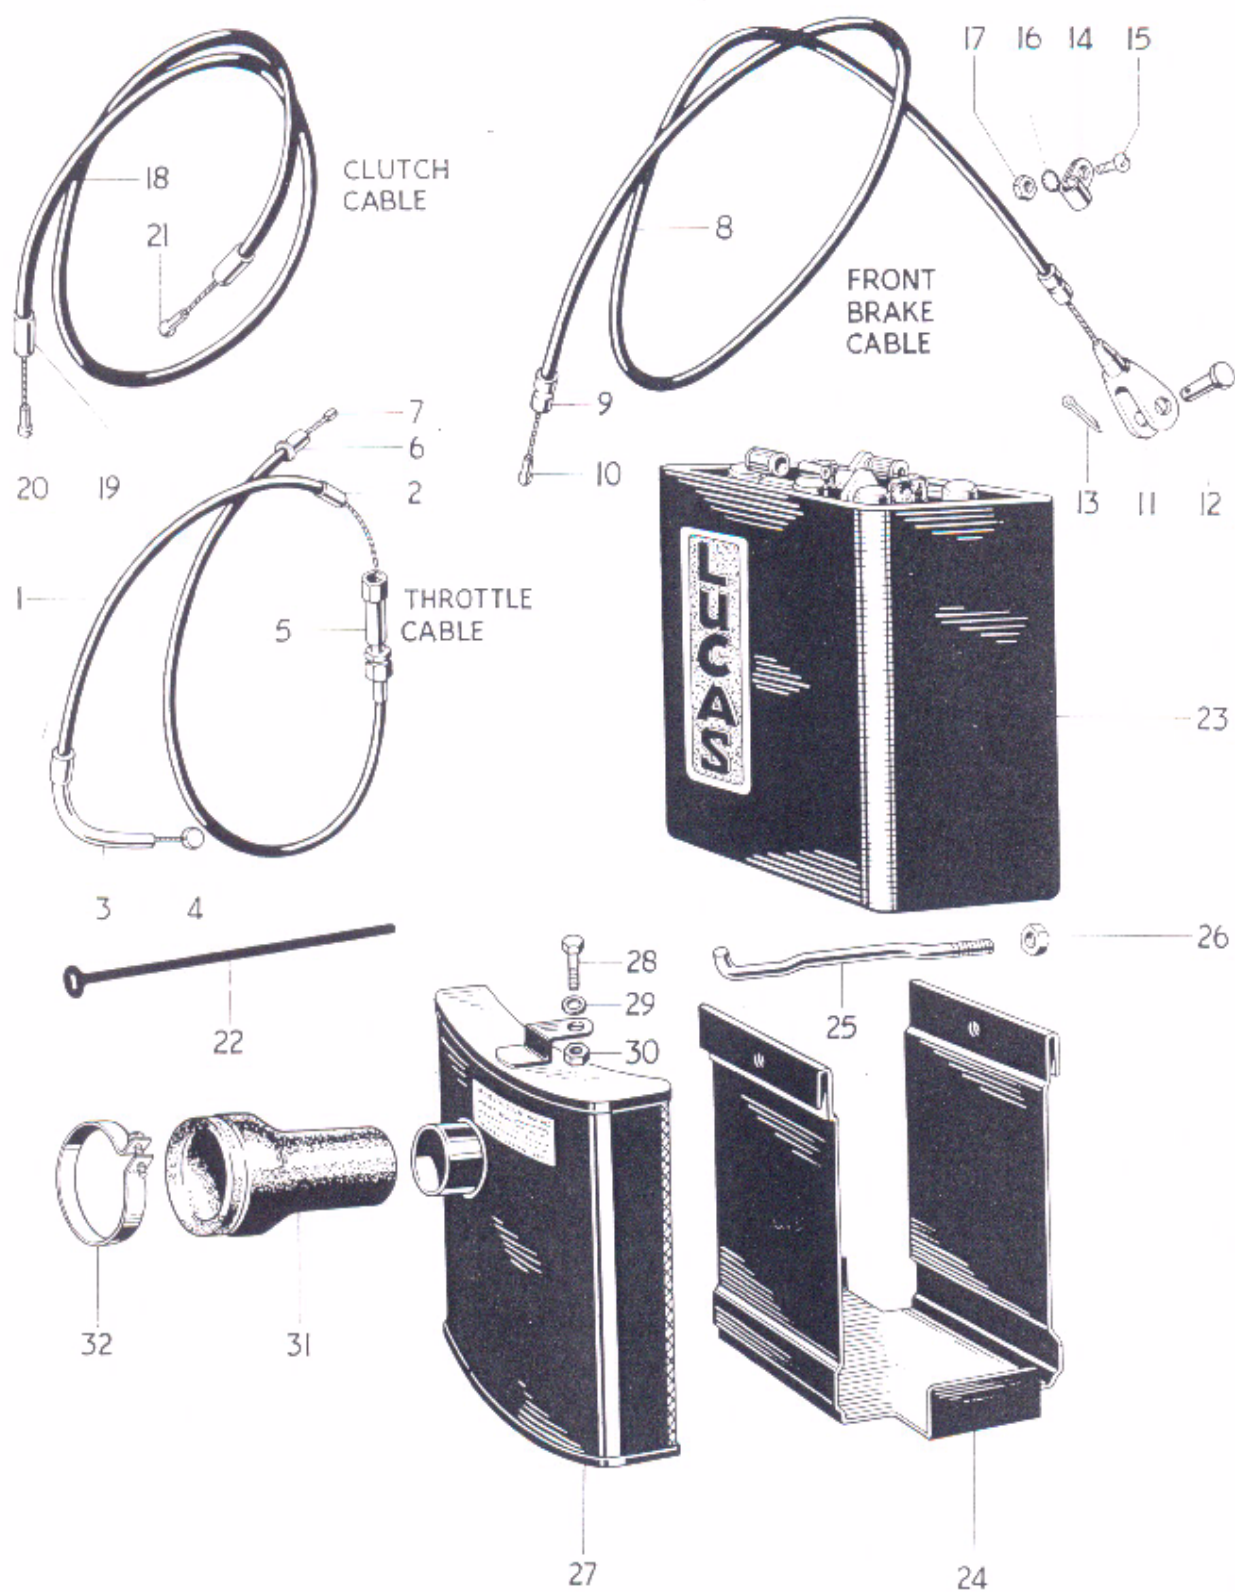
CONTROL CABLES, BATTERY CARRIER AND AIR FILTER.
